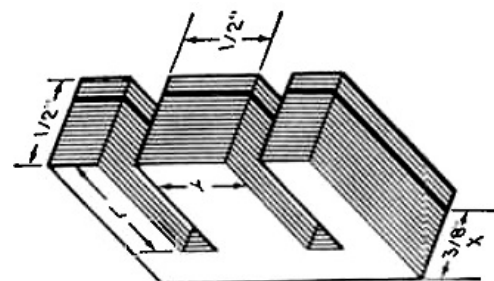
Calculate X dimension needed to provide core area when multiplied with Y dimension; then, as indicated by heavy lines, remove required number of metal laminations.
